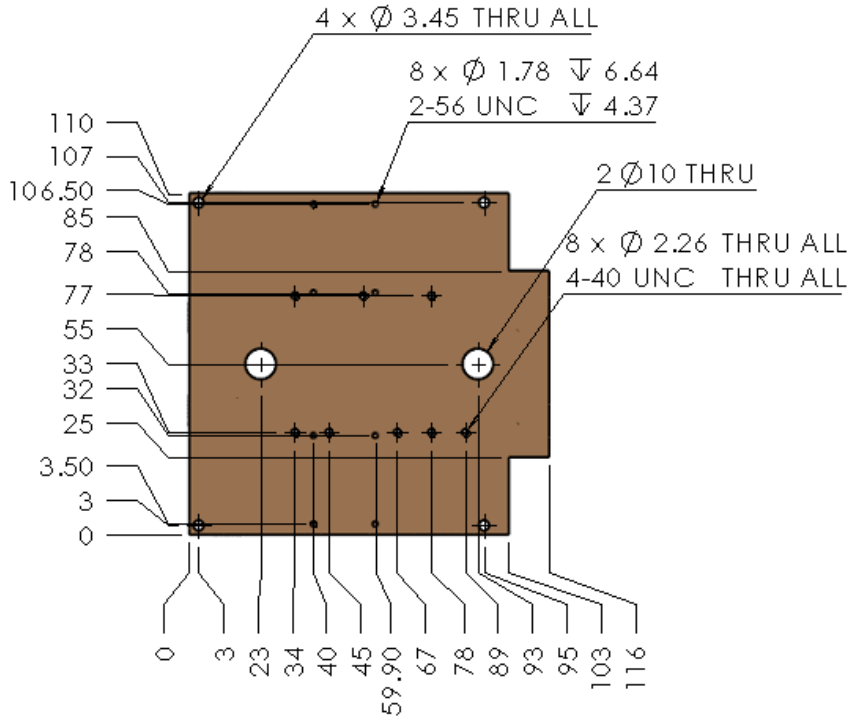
Outline dimensions of WP-03 (Dimensions in mm)
